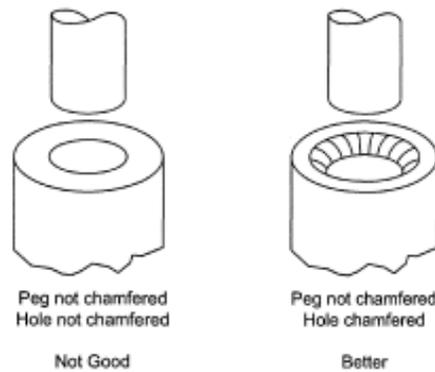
depicts two drawings juxtaposed side-by-side. The left drawing depicts a peg that is to be inserted into a hole that is not chamfered. This assembly method is labeled – “Not Good.” *Id.* The drawing on the right depicts a peg that is to be inserted into a hole that is chamfered. This assembly method is labeled – “Better.” *Id.
